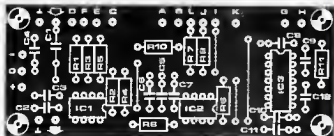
Printed circuit board end component layout for the parametric tone controls.
